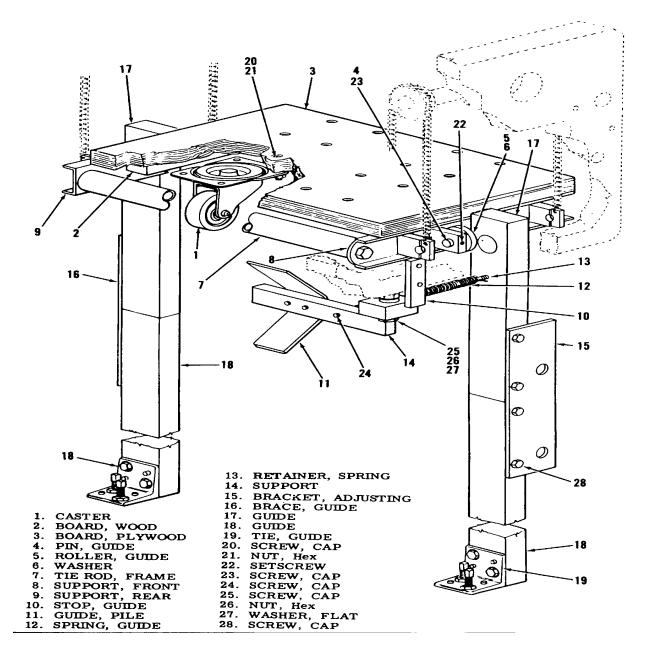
Delivery Board and Pile Guide Assembly, Exploded View.
